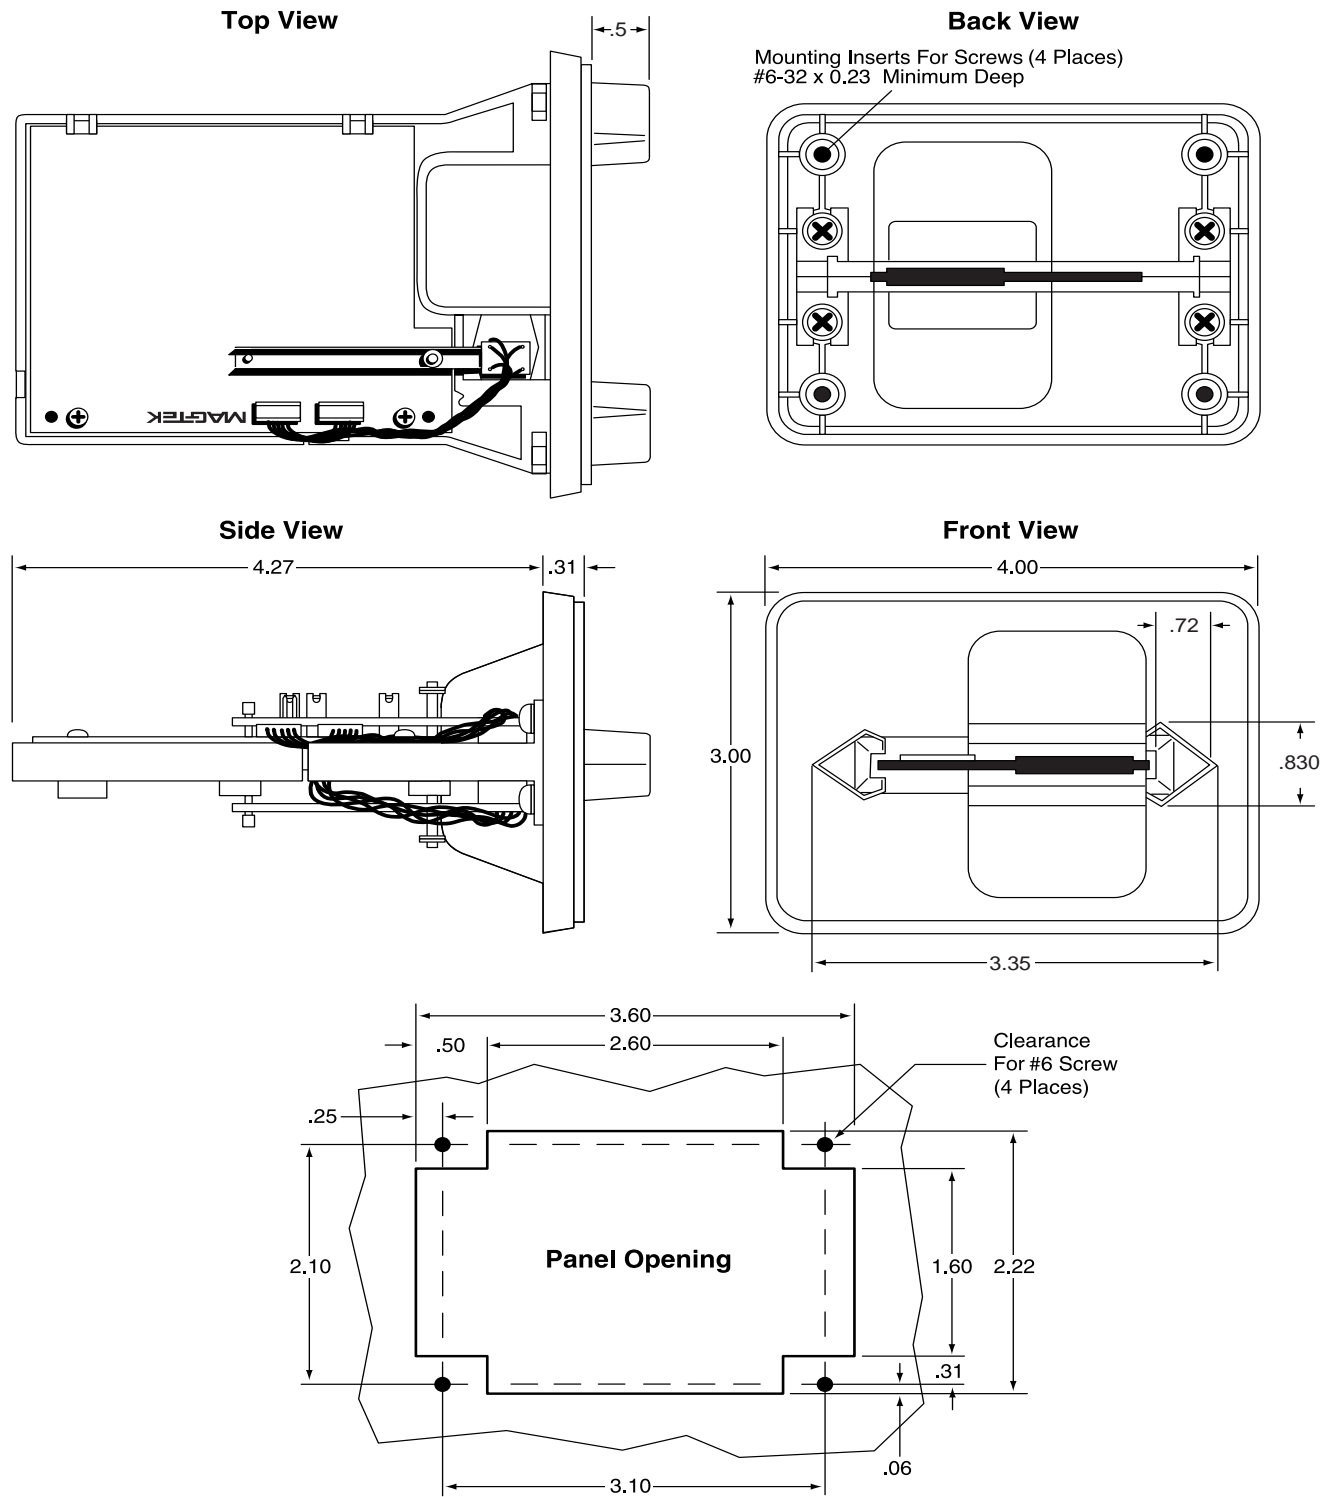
MagTek Extended Bezel Mounting Dimensions
